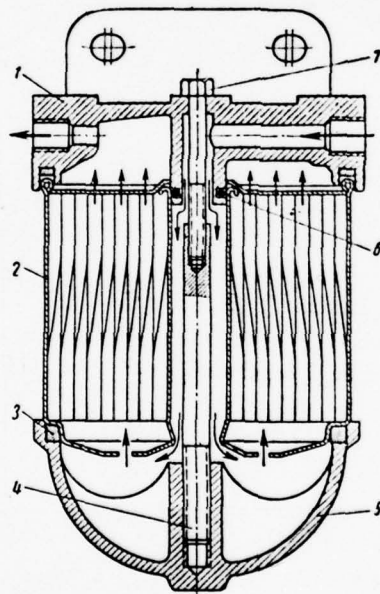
Fine filter of fuel/propellant with paper filtering cell/element: 1 - head of filter; 2 - filtering element; 3 - ferrule; 4 - connecting rod; 5 - cap/cover of filter; 6 - ferrule; 7 - bolting together.
